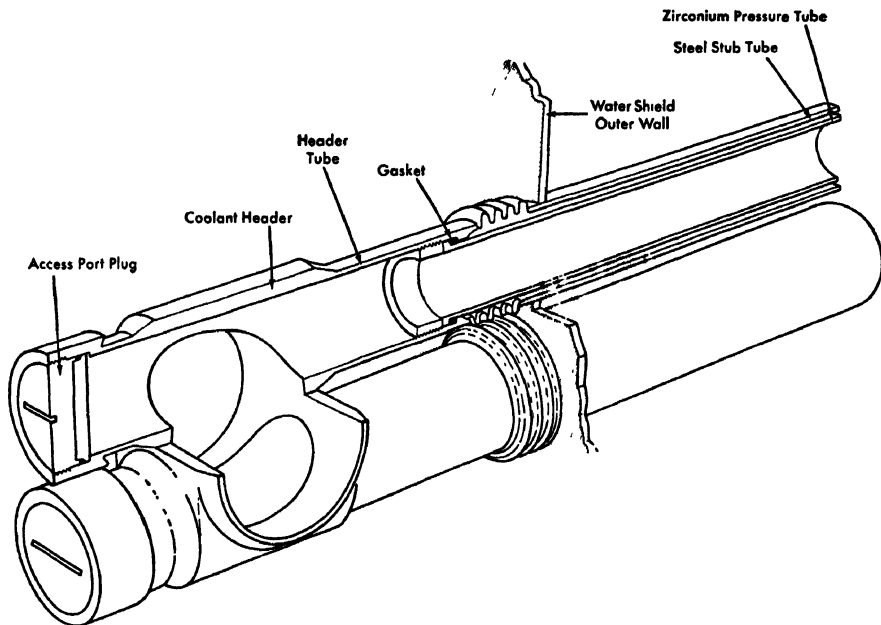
Detail of pressure tube end connection and header (GNEC)
